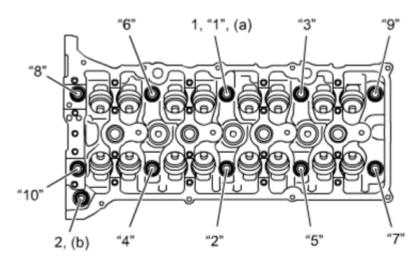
Tightening Cylinder Head Bolt Specified Torque Courtesy of SUZUKI OF AMERICA CORP.
